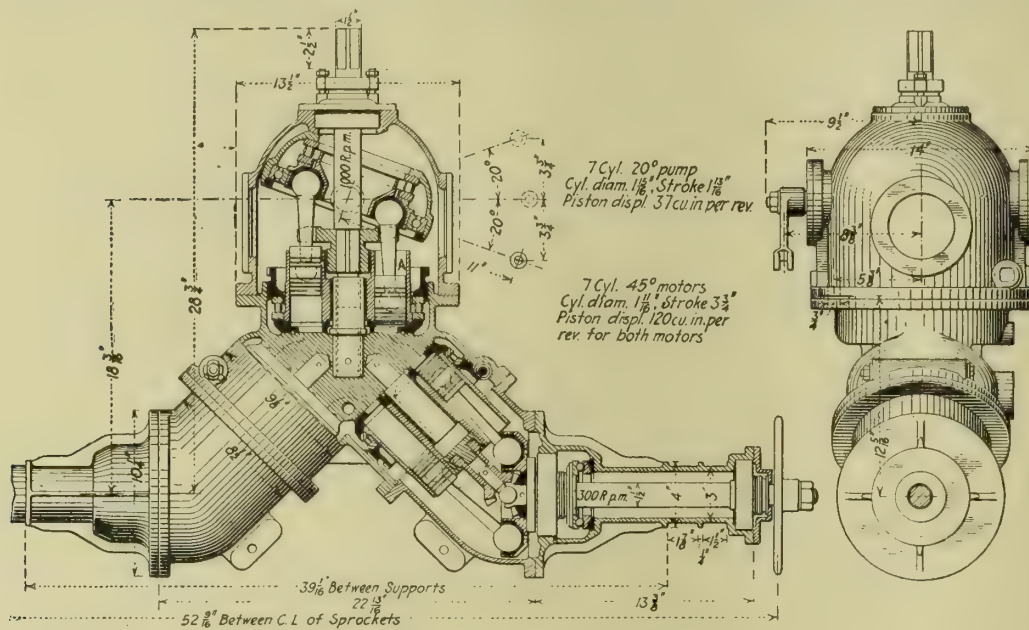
SECTION OF VARIABLE-SPEED HYDRAULIC POWER TRANSMISSION GEAR.
